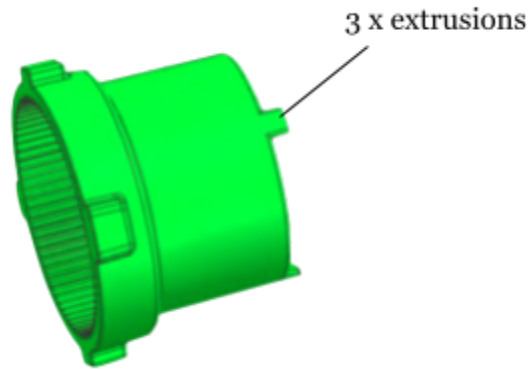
Ring gear image with a callout at extrusions where torque is felt and forces were determined for FEA Ansys modeling.
